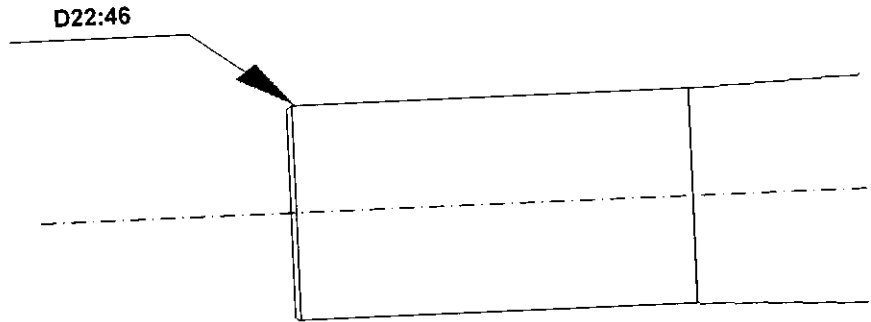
Relation for chamfer on left side of Drive Shaft
